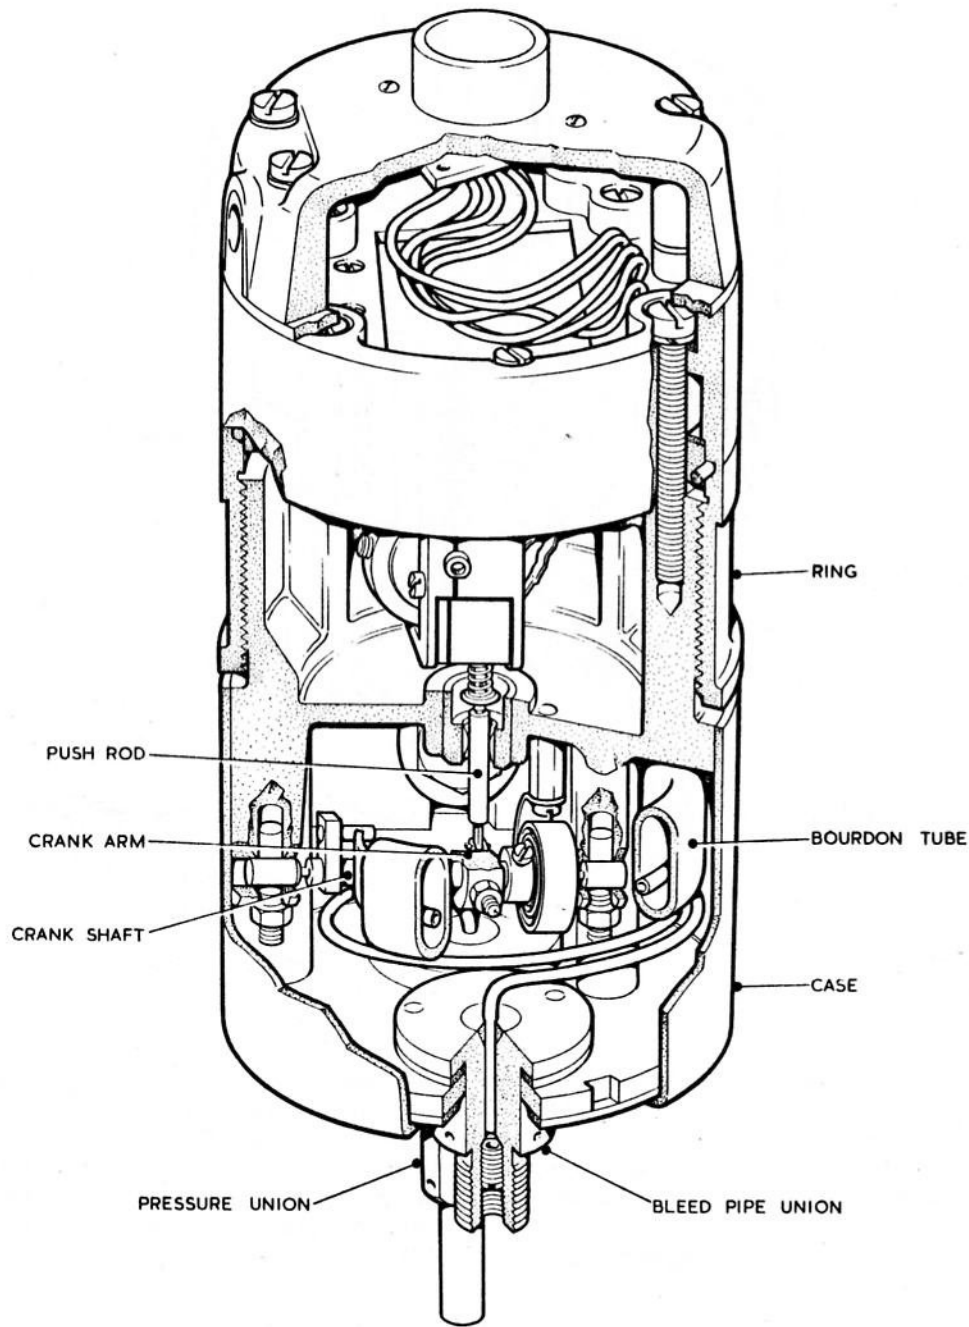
General arrangement, Bourdon tube transmitter hydraulic unit
